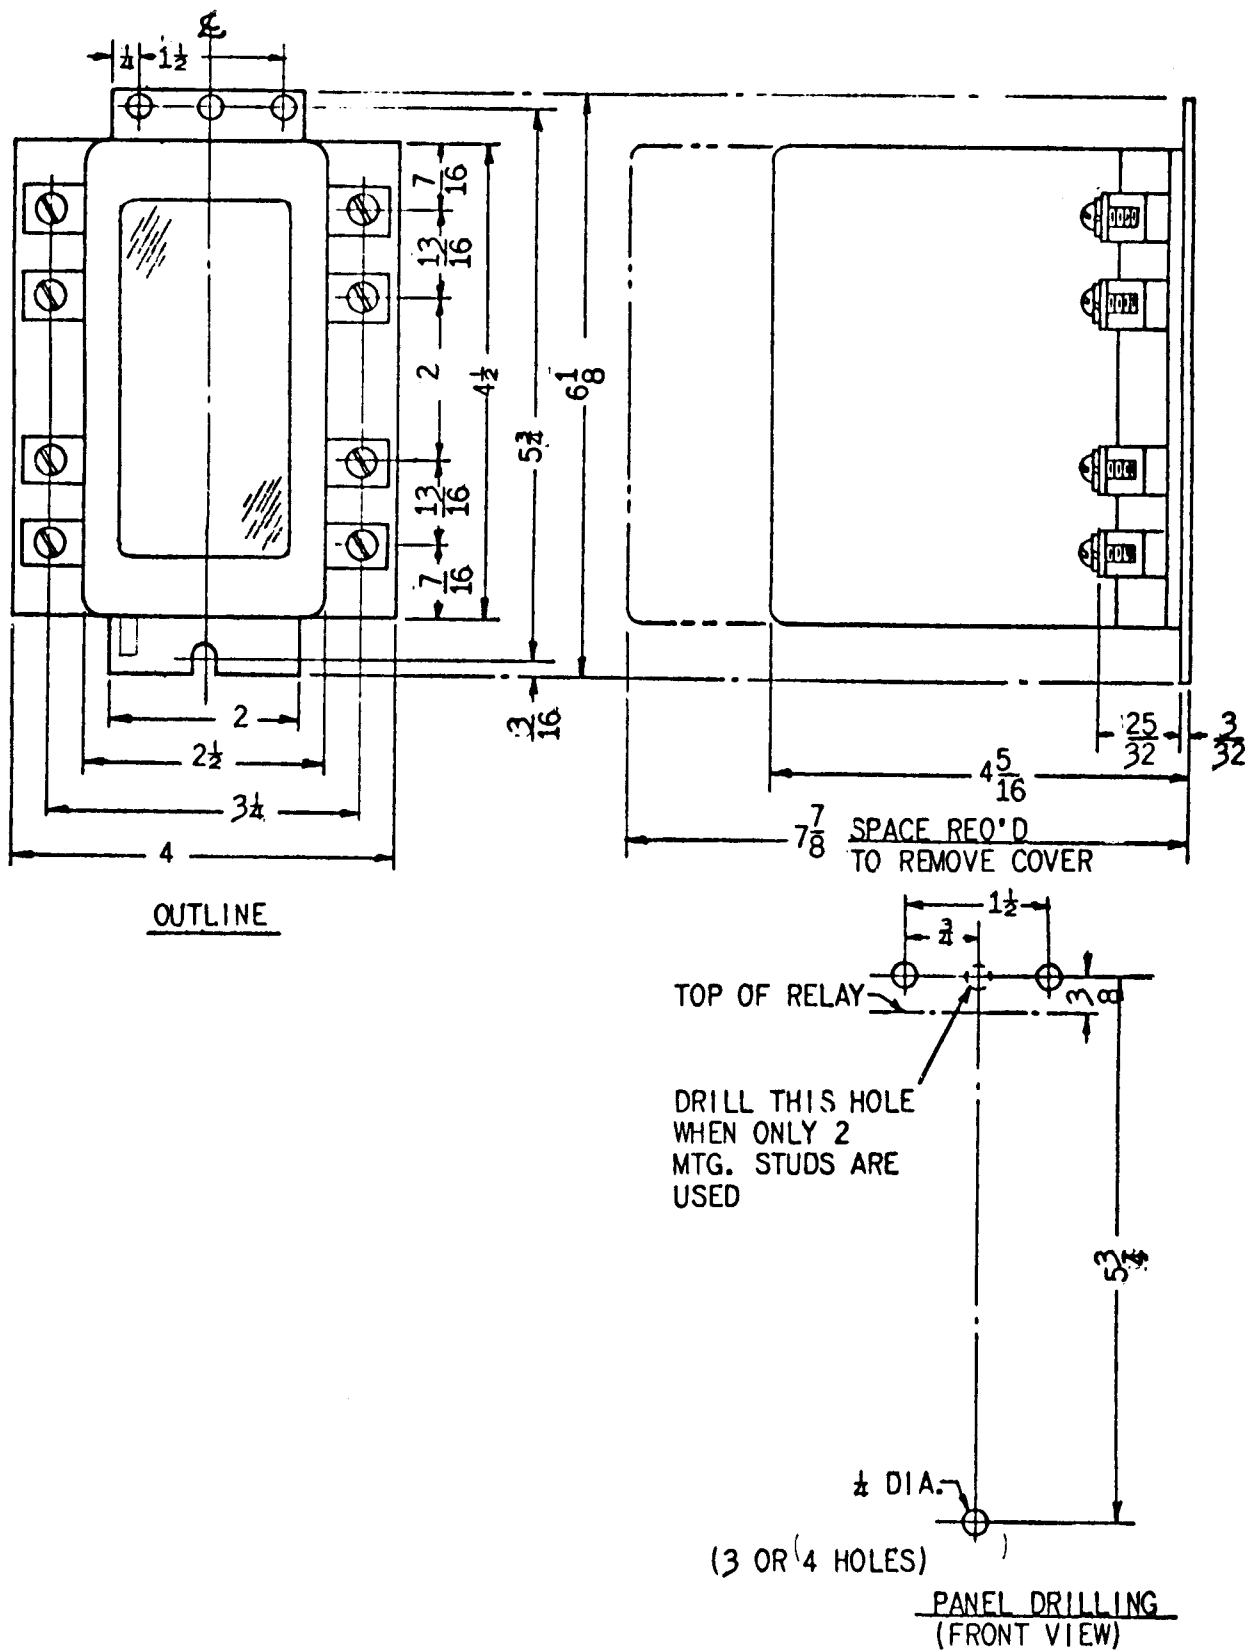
(0208A3773-0) Outline and Panel Drilling Dimensions for the Front Connected Surface Mounted HAA15E, HAA15F and HAA15G Relays
